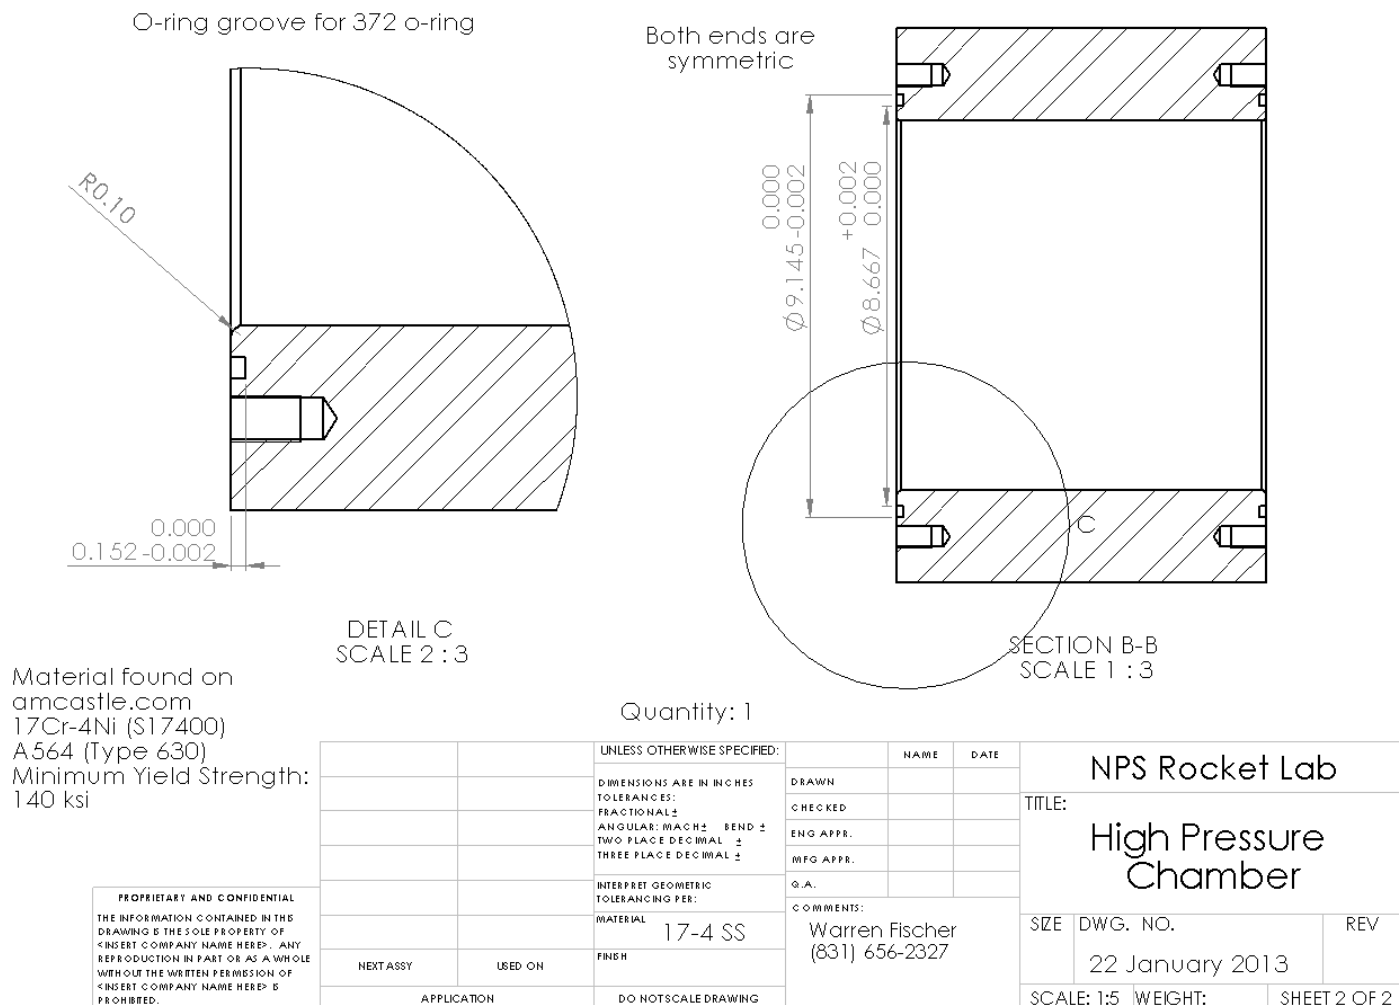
High Pressure Chamber Fabrication Drawing (View 2 of 2)
